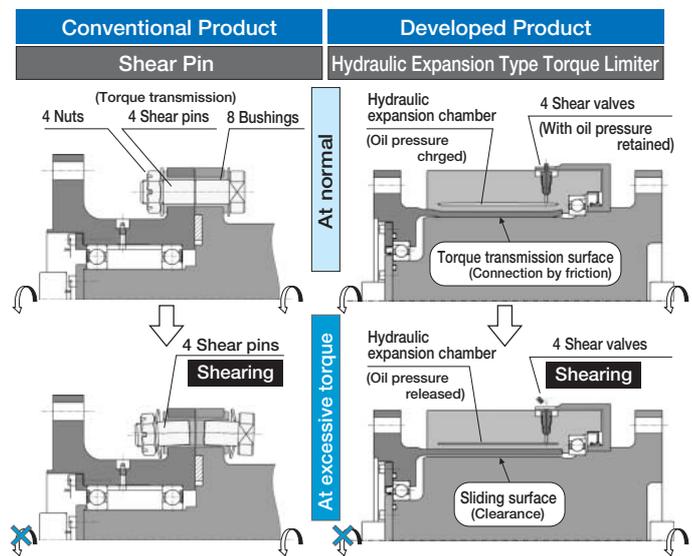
Working Principle of Shear Pin & Hydraulic Expansion Type Torque Limiter
